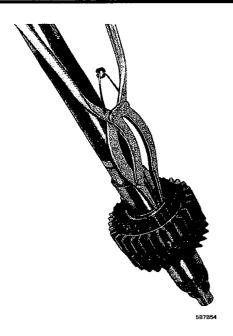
B-54 - Removing 1st and 2nd Synchronizer Snap Ring
